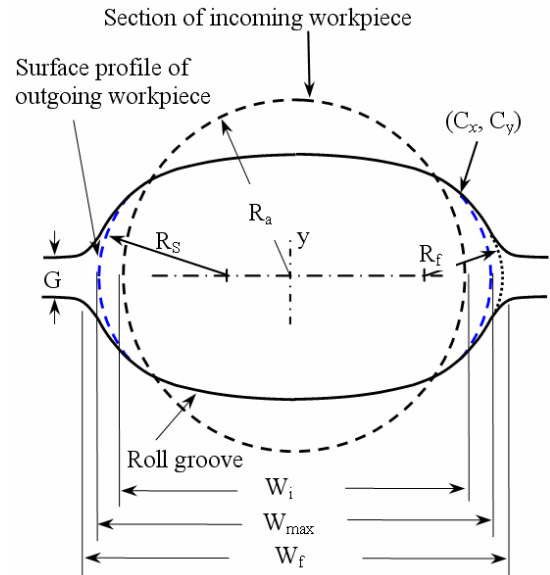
Geometrical designation of the 2-R roll groove, the incoming workpiece, and the radius of the surface profile, R_s , of the outgoing workpiece in the round groove-to-2-R oval groove rolling sequence.
